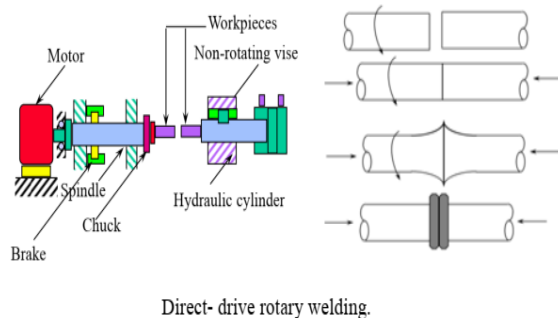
Schematic diagram of rotary friction welding set up
